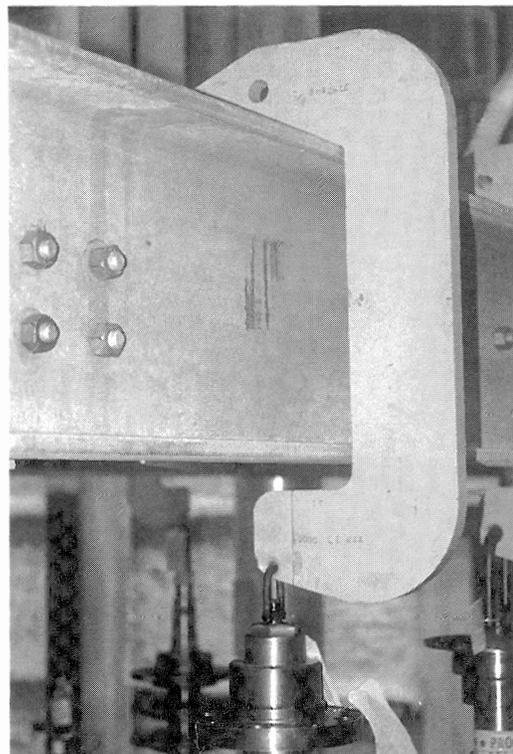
Standardized Fixturing Package for a Rotor That Utilizes the Coupling Nut Threads (which includes a rotor hanger, hoist ring, and an adapter plate threaded onto the coupling nut threads).
